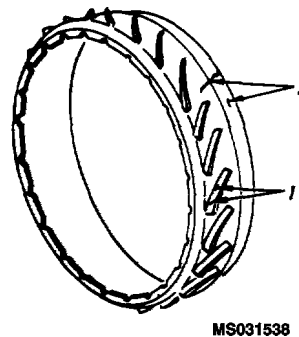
Hot Section Inspection Points (Sheet 2 of 2).
